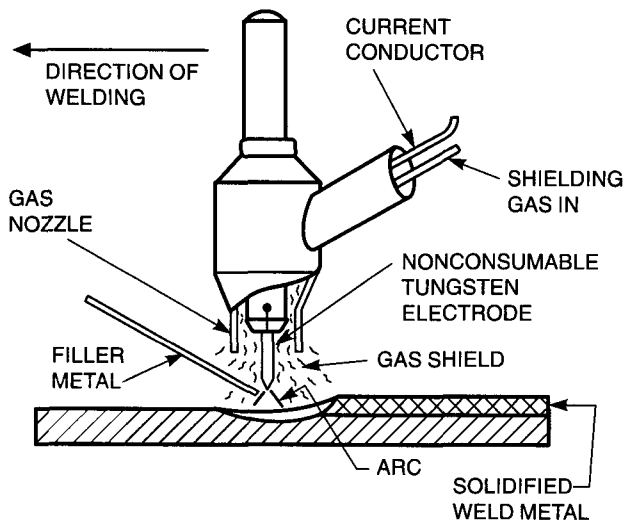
Schematic View of the Gas Tungsten Arc Welding Operation
